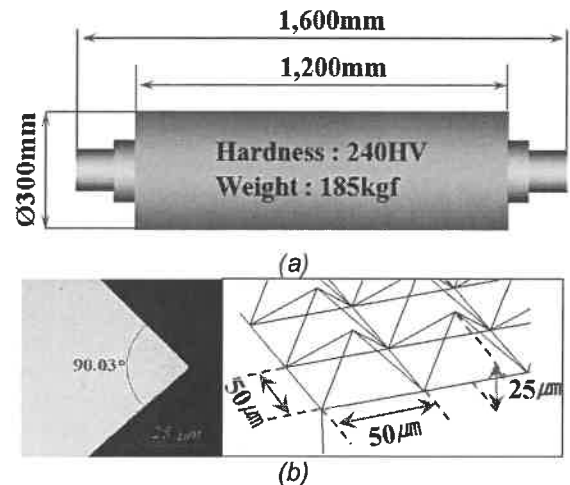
(a) Specifications of machined roll mold and (b) a tool and shape of pyramid pattern.
